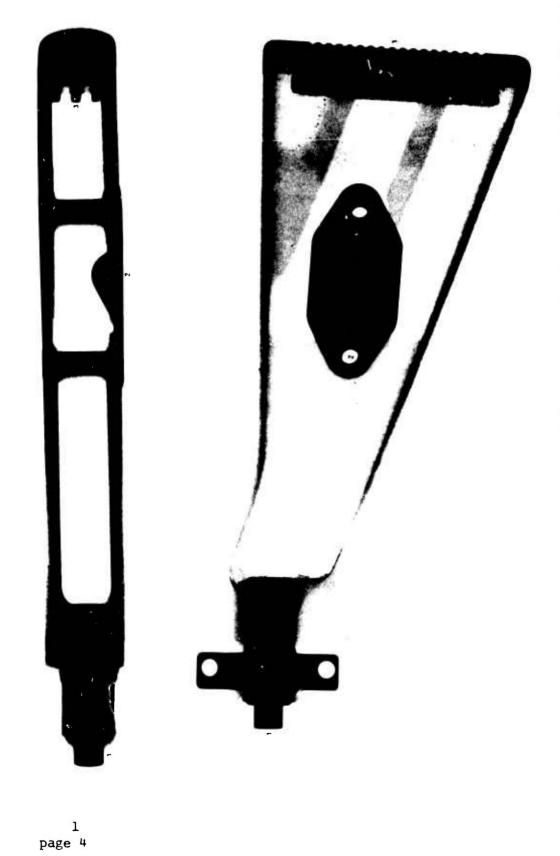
Radiograph of Top and Left Side Views of HK-23Al Buttstock. The Buffer Assembly (1), Rear Sling Swivel Base (2), Buttplate (3), and Buttstock Body Wall (4) Are Shown.
